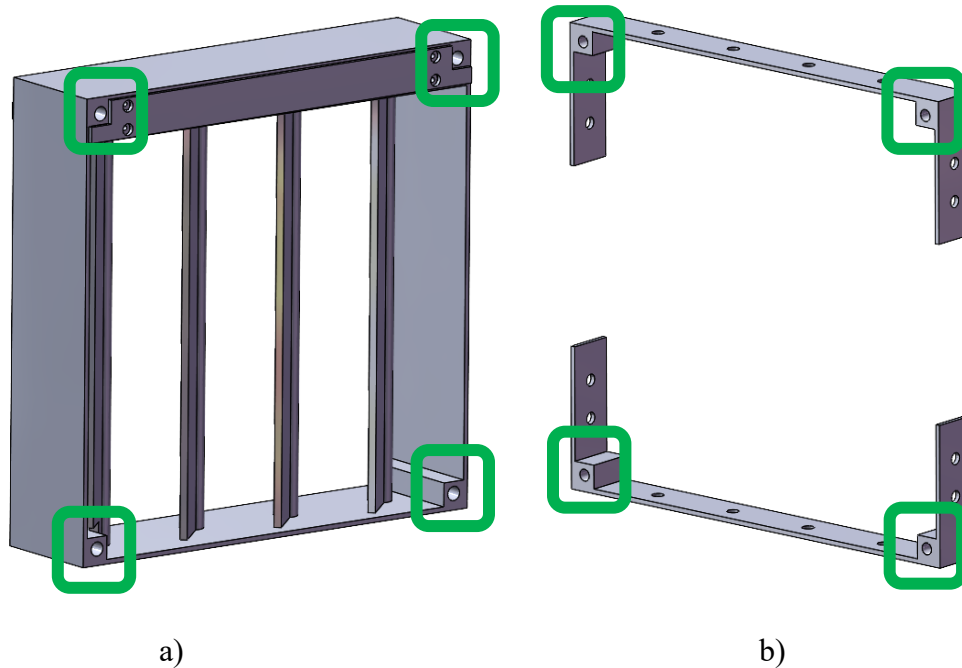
Bolt (green) locations on the a) modular damper assembly and b) mounting bracket.
